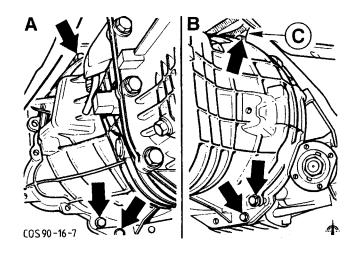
Transmission housing flange bolts in cylinder block/sump.
